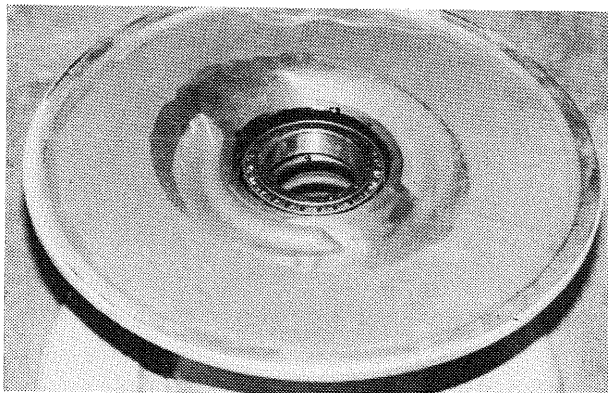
Drum & Freespool Assembly (1 of 7)
